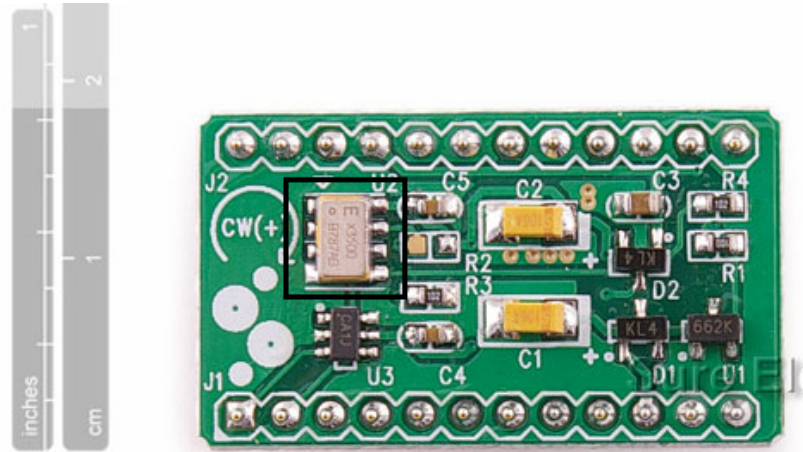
, Prototype PCB for XV-3500CB Gyro [4]
